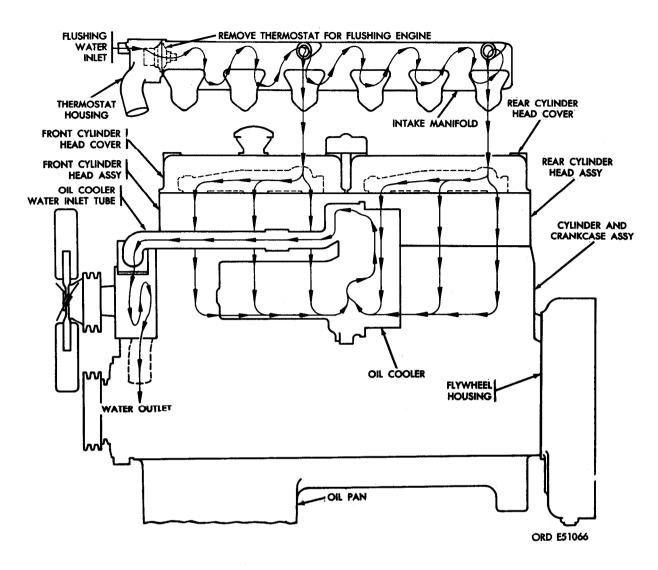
REVERSE FLUSHING ENGINE COOLING SYSTEM.
